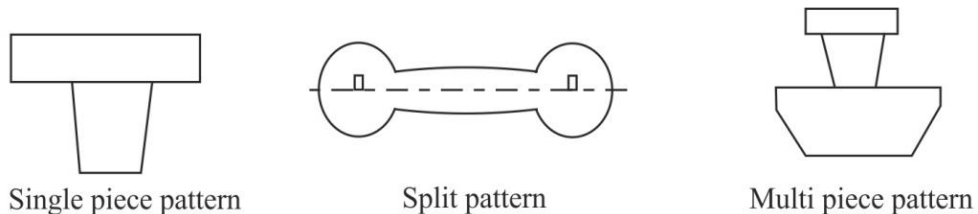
Types of patterns: Single piece; Split piece; Multi piece patterns
